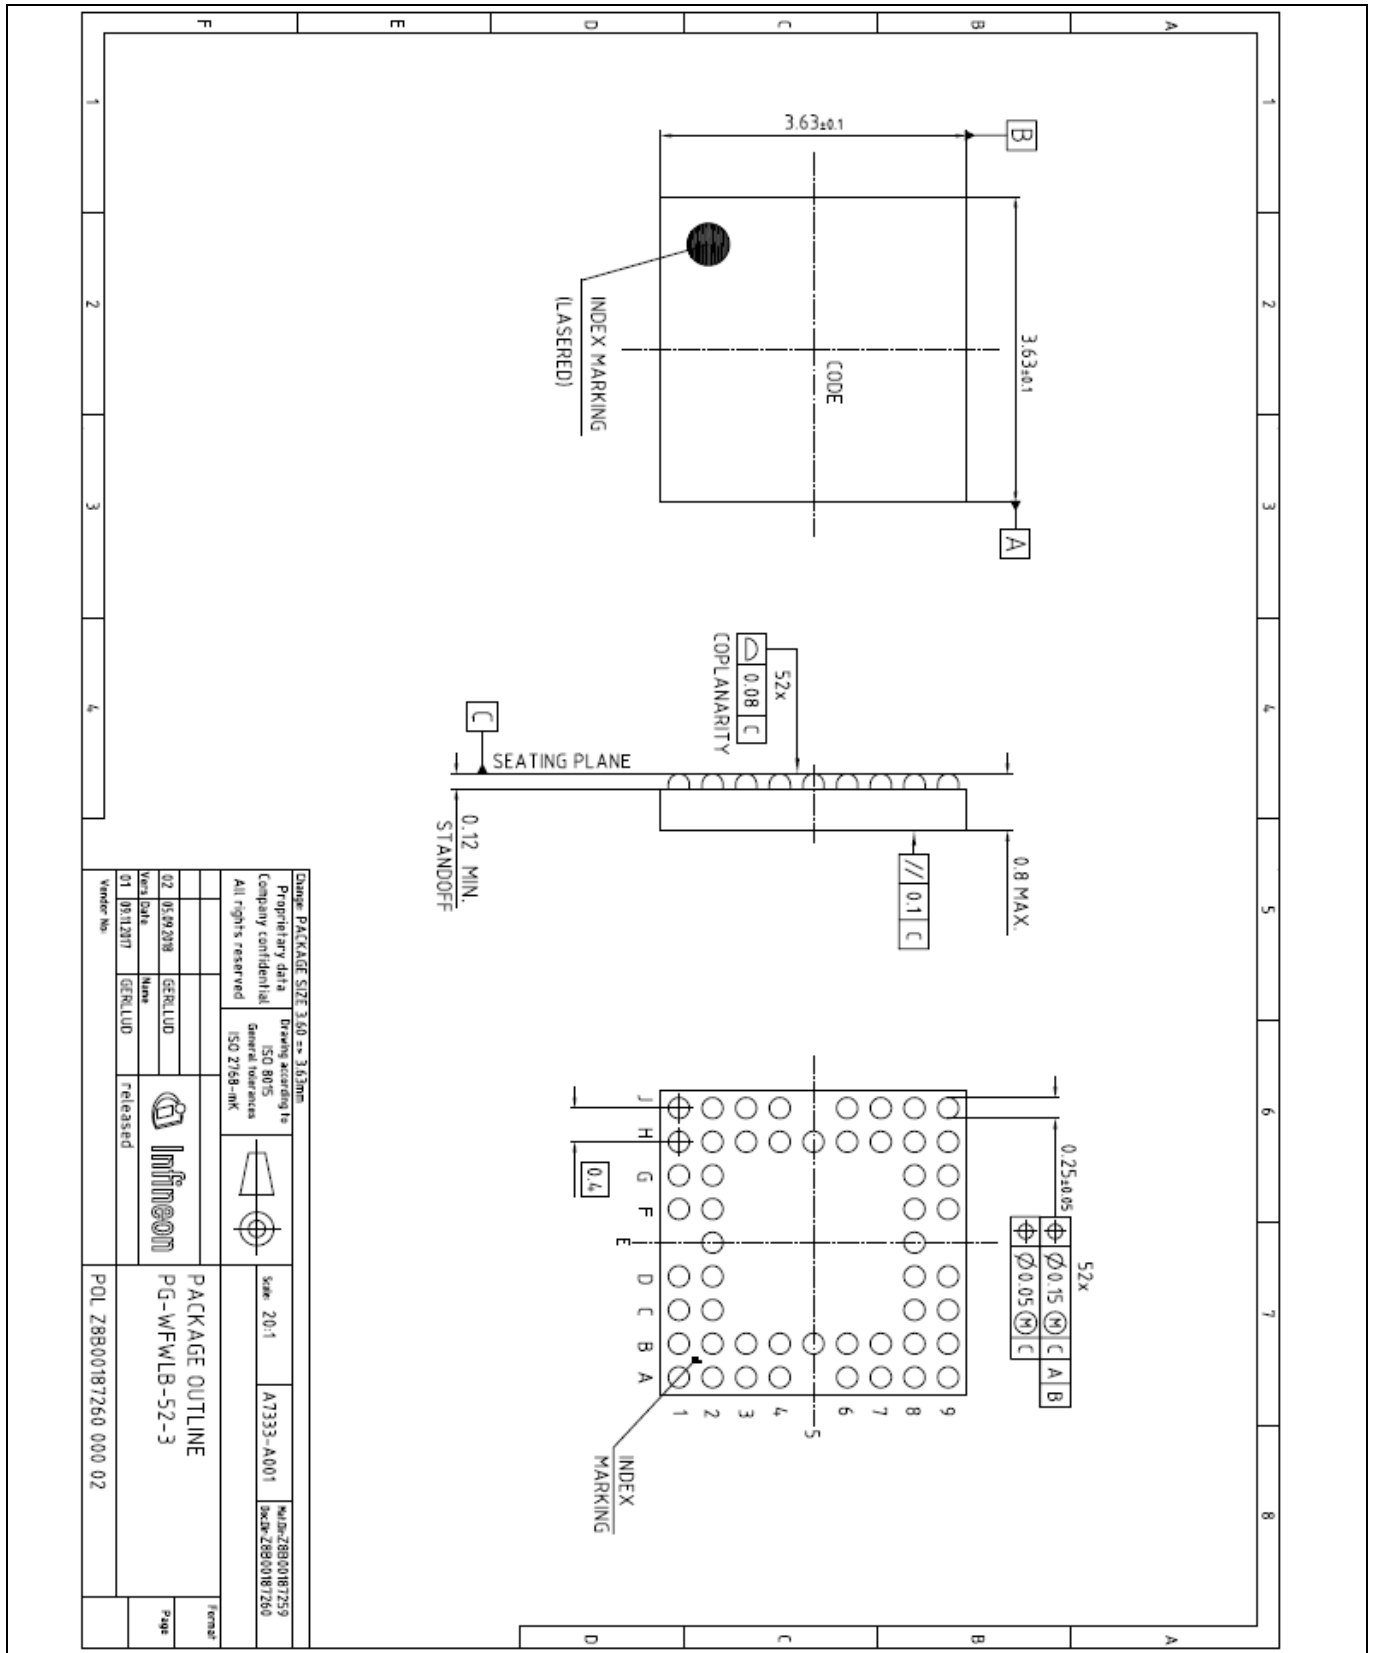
Package outline. Top, side and bottom view of WFWLB-52-3
